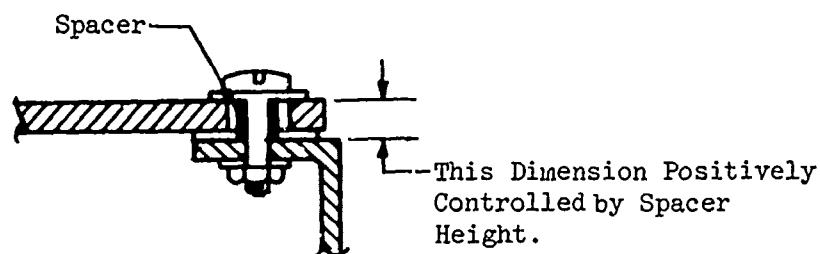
Spacer Used to Control Clamping Dimensions.
